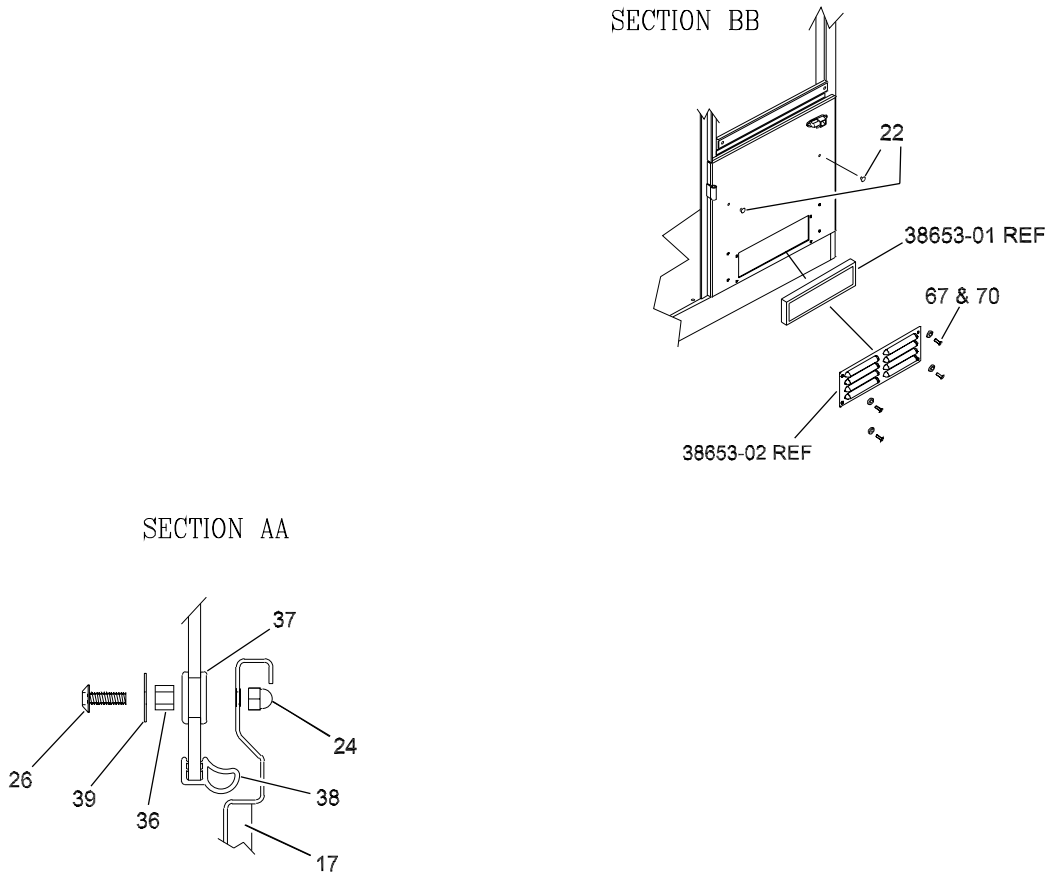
CAB ASSEMBLY (SHEET 1 OF 6)
